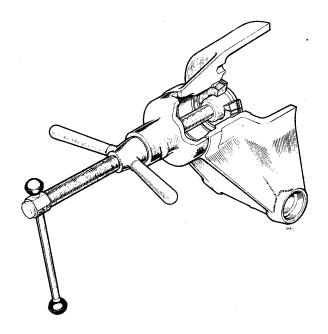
Replacing the hub bearing outer races using the special tool, Churchill Tool No. J.20A with adaptor Churchill Tool No. J.20A—1.
